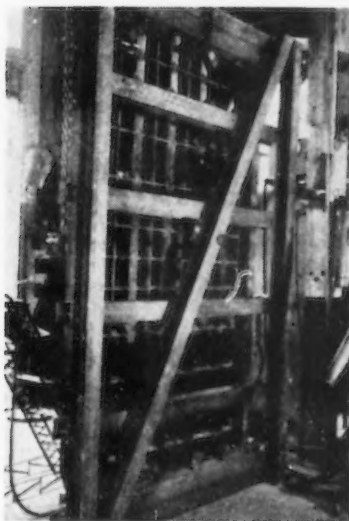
Trouble with warpage in fabricating this foundry shakeout grating prompted a study which resulted in a marked reduction in welding and cleaning time.
